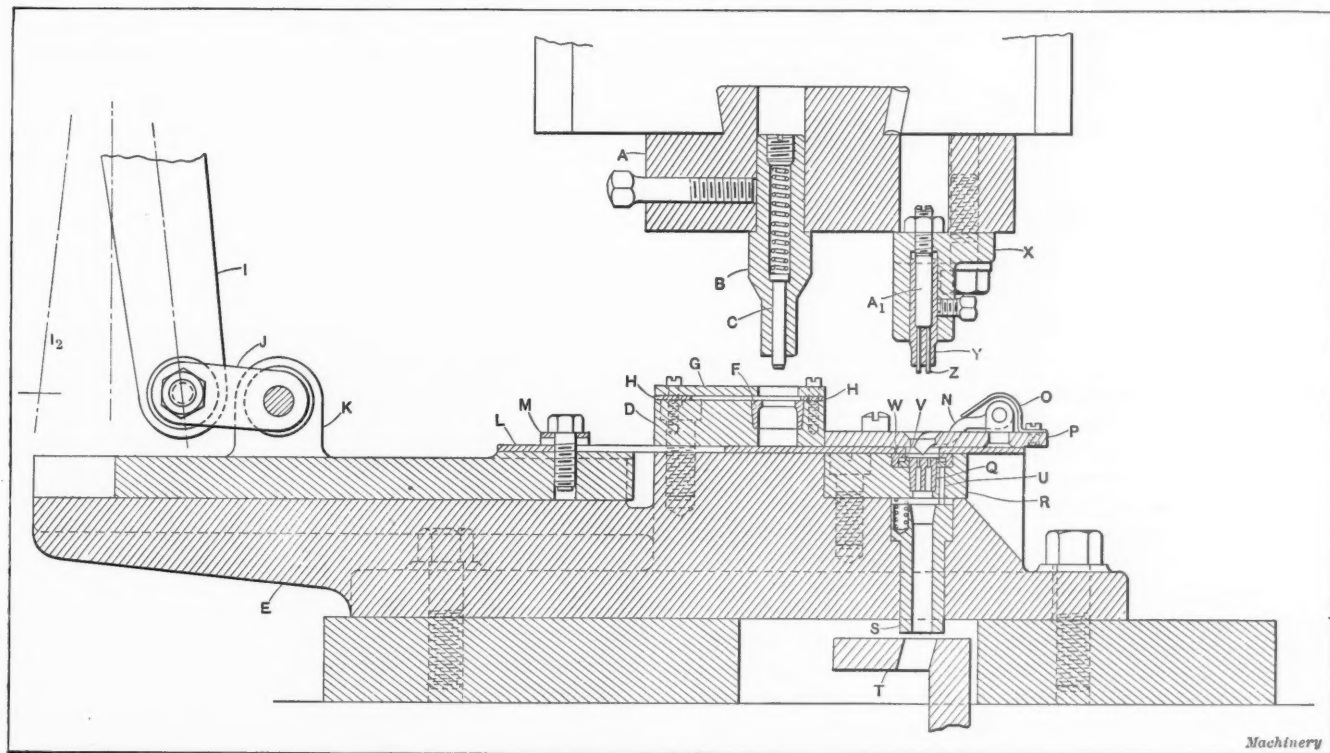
Cross-sectional View of Button Back Blanking and Piercing Punch and Die
